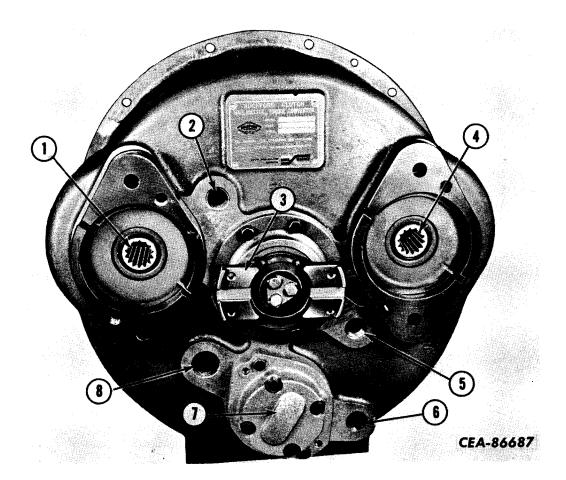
1 Torque Converter and Accessory Drive - Front View.
